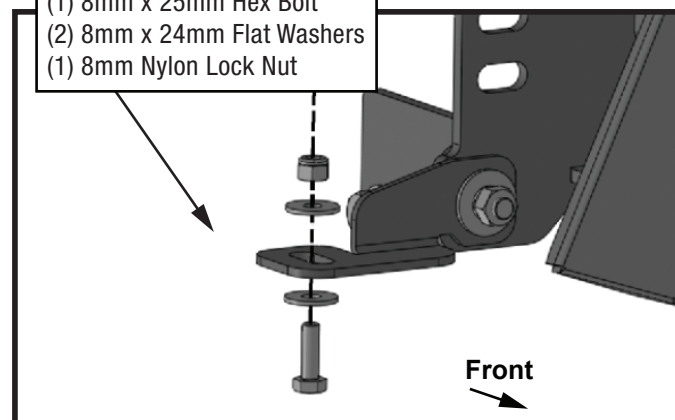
Passenger/Right Mounting Bracket and Support Bracket installed
